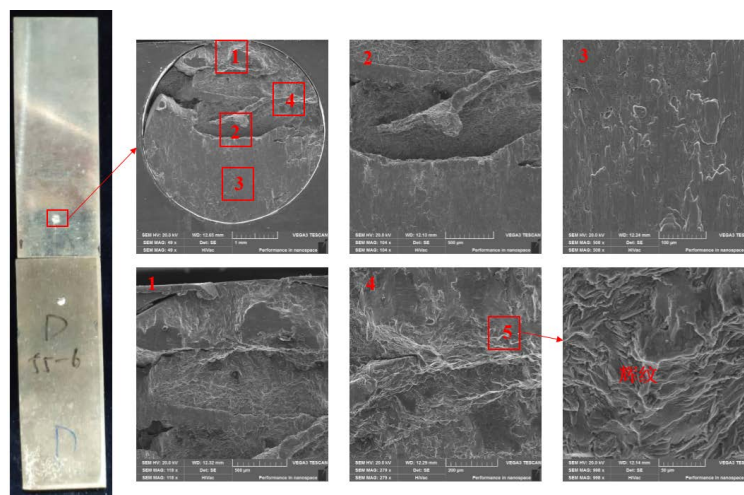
Fatigue fracture of electromagnetic riveted joint
